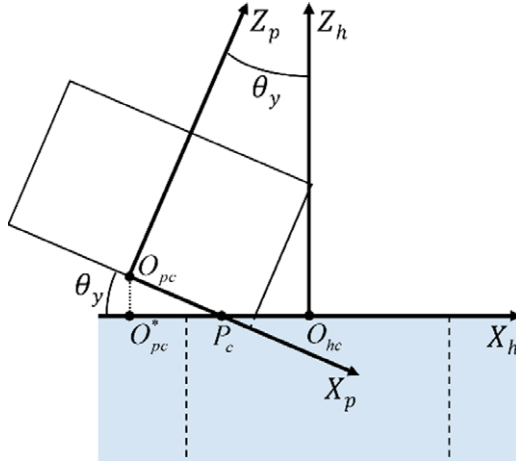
The side view of two-point contact state in the cylindrical parts assembly.
